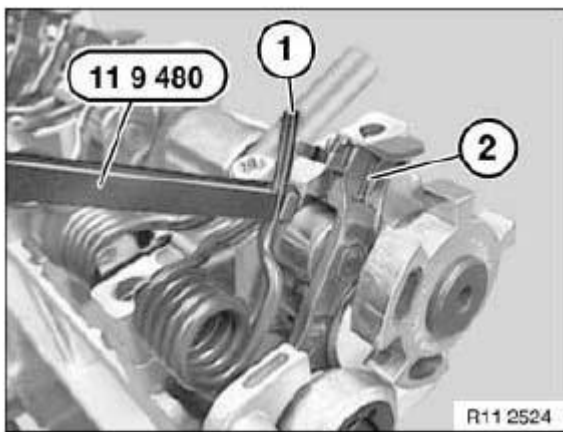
Identifying Special Tool (11 9 480) And (11 9 490)
